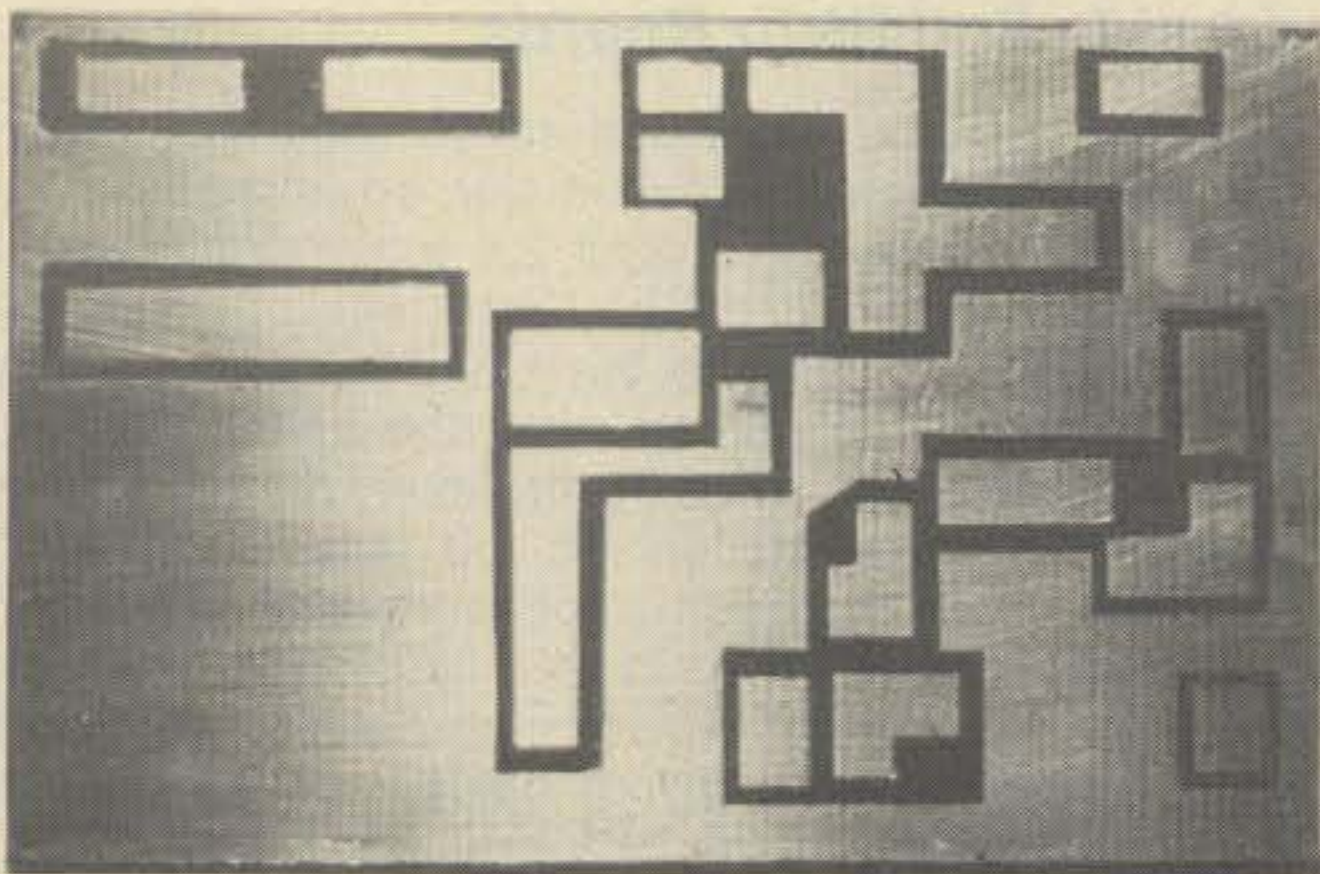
The finished p.c. board after etching and removal of address label adhesive. Considerable accuracy is possible with this technique, as the address label is backed with an excellent adhesive that permits very sharp edges. The board can be made as neat as time permits.
